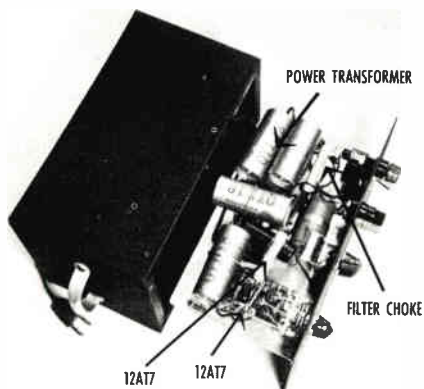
Inside view showing parts placement. Arrows indicate location of transformer, choke and tubes mounted on top of chassis.
